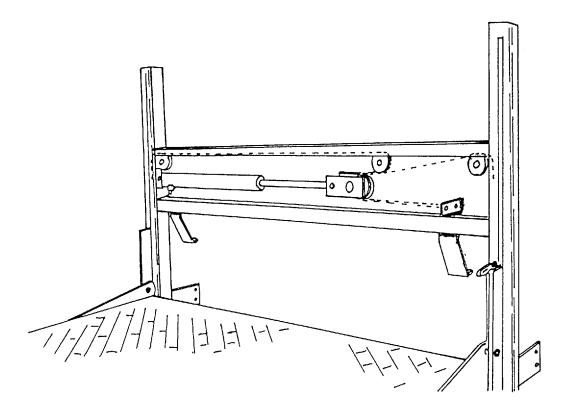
OVERALL VIEW WITH COVER REMOVED
